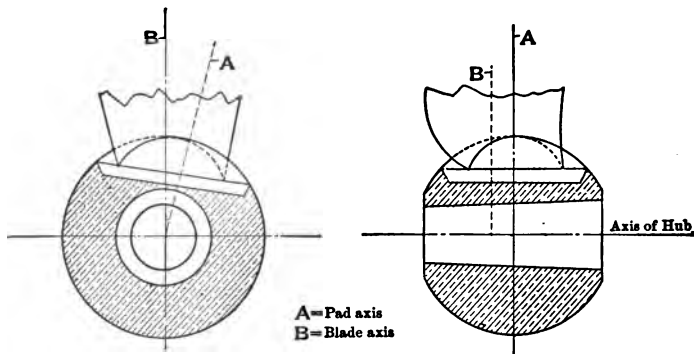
Correct Method of Changing Blade Position to Permit Bolting to Hub.
